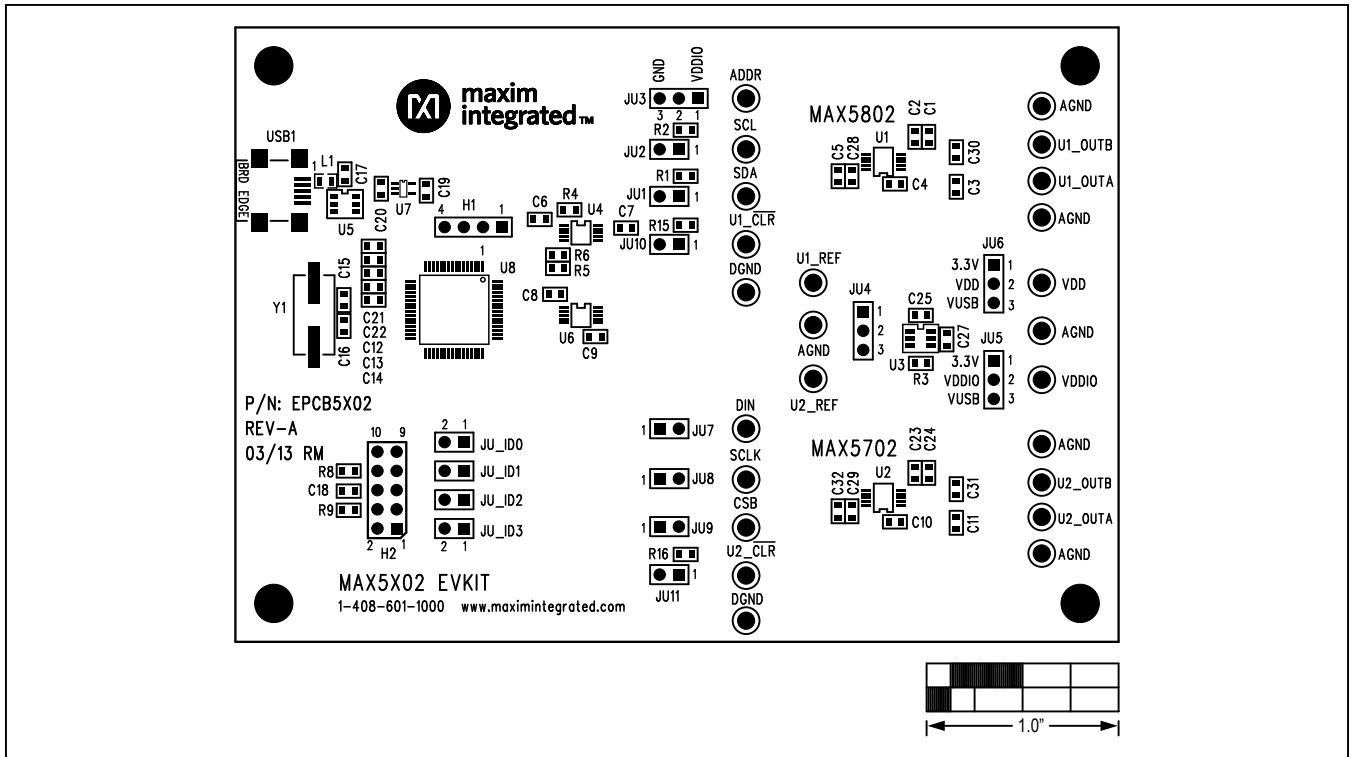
MAX5X02 EV Kit Component Placement Guide—Component Side
